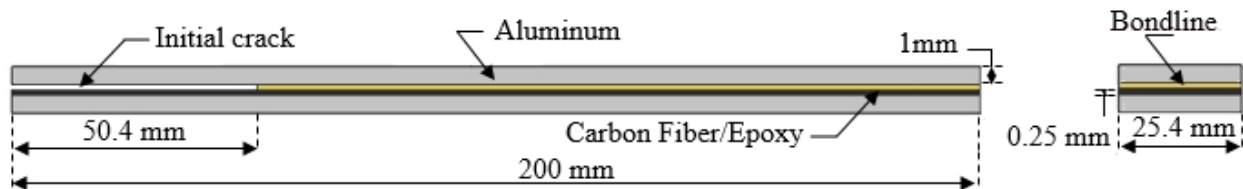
Schematic of T-peel specimen along with dimensions (mm).
